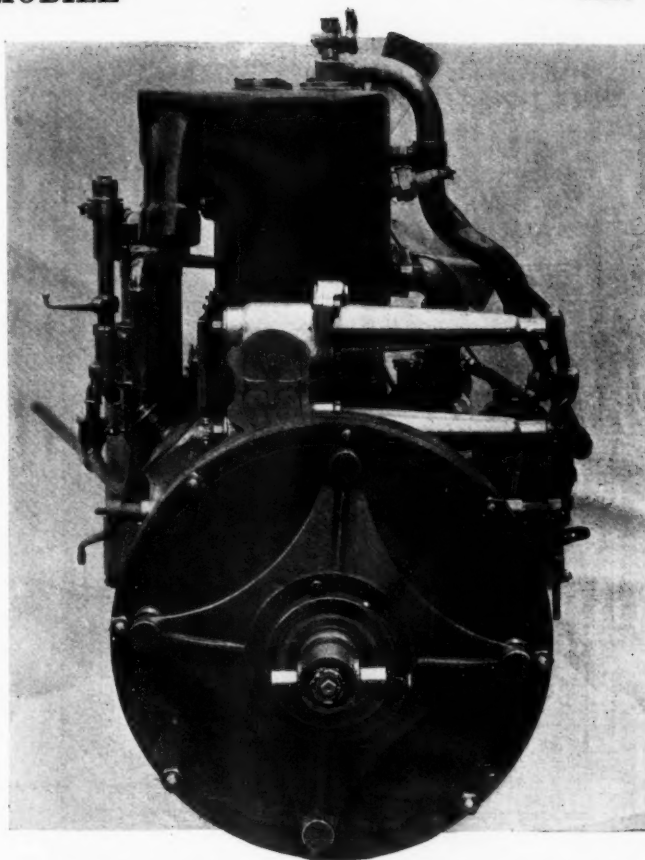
End view of the Rockefeller sleeve valve motor, with sleeves located on the left side and occupying the same relative space as poppet valves
